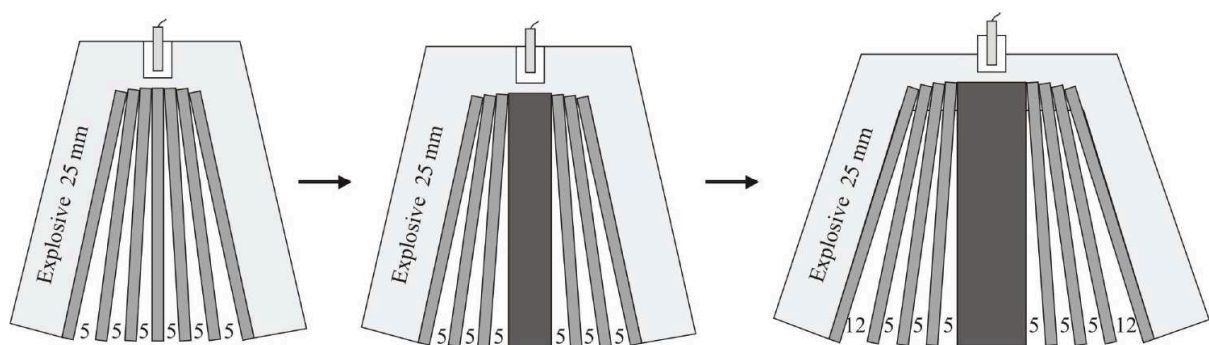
A 21-layered steel composite was produced via impact welding in three steps (Bat2011).
